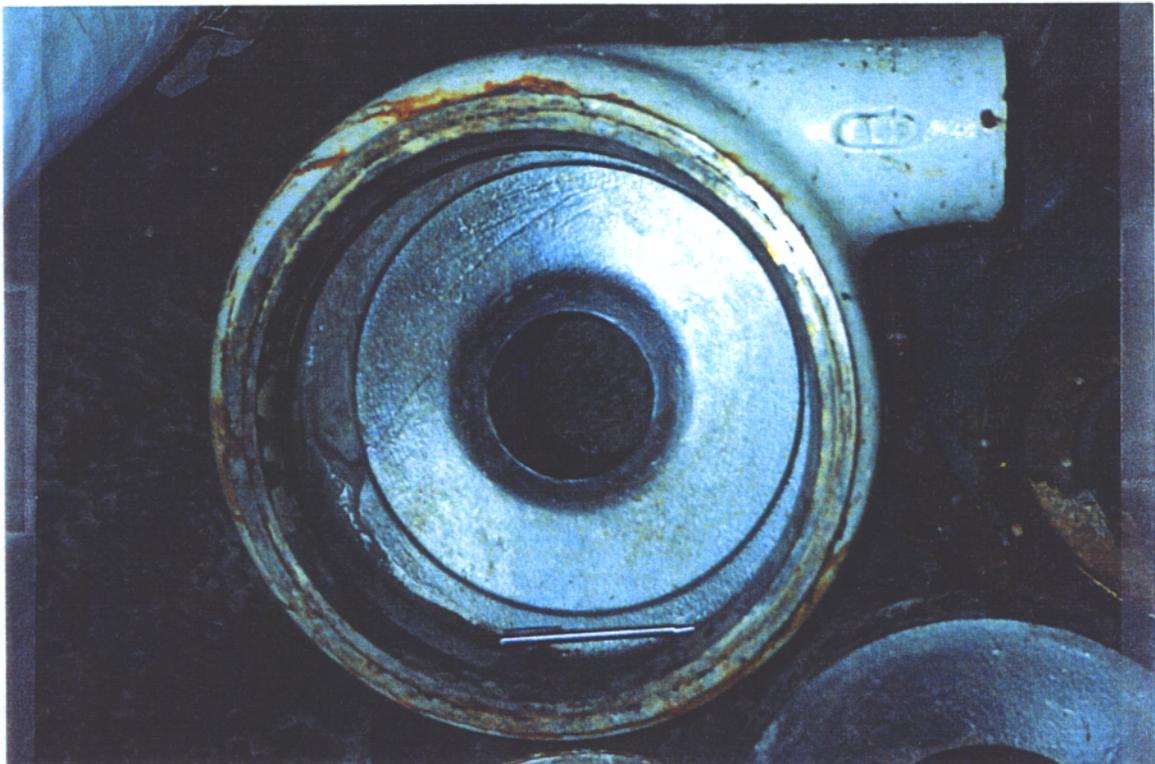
Gypsum Slurry Transfer Pump Casing
